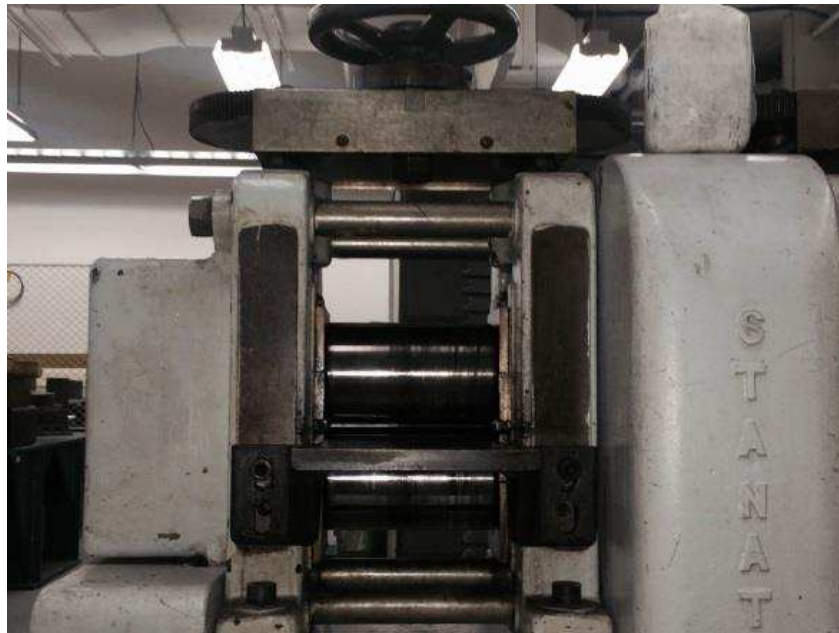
Rolling mill used to fabricate HEA foils in the physical metallurgy lab
